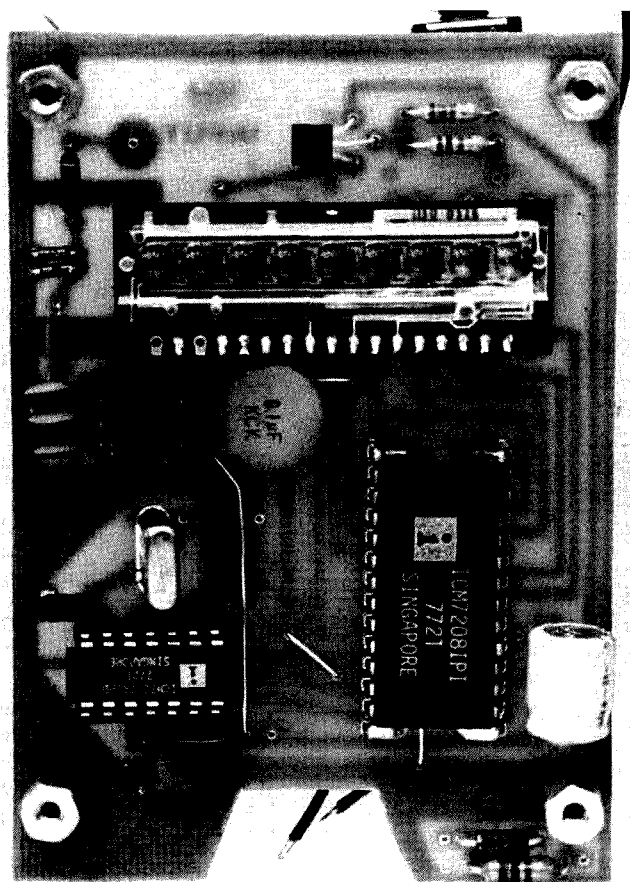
Completed component side of the circuit board. Your finished board will look like this.
